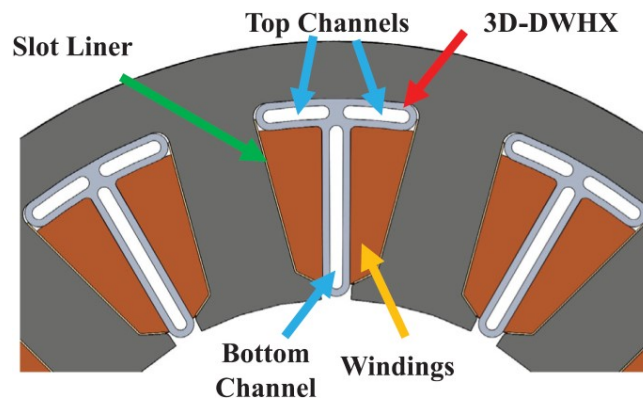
3D printed heat exchangers and their arrangement on the stator of a concentrated winding machine. Source: [50]
